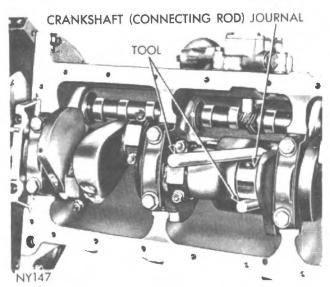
Removing and installing connecting rod (Tool CA-3221).
